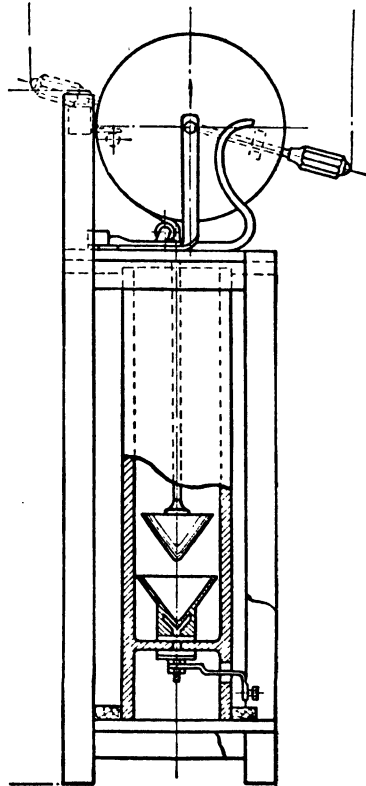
SECTIONAL VIEW OF LIQUID DIMMER
